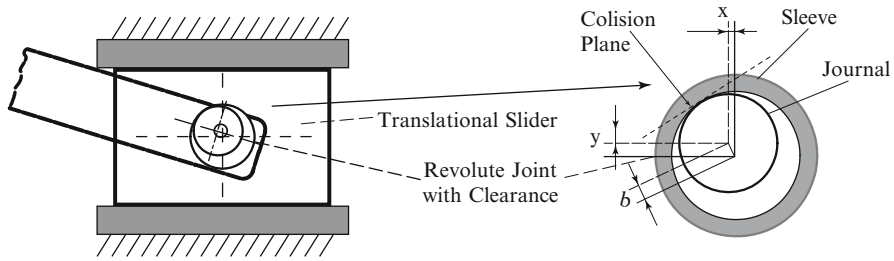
Revolute joint with clearance (clearance is exaggerated to make it visible)
